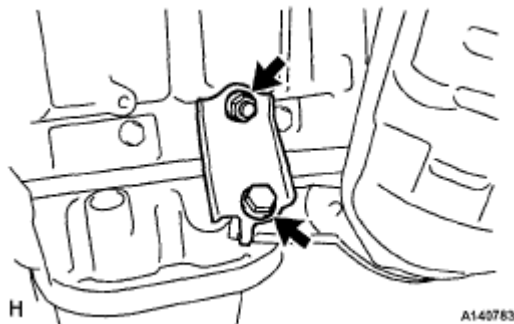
Identifying No. 2 Manifold Stay Bolt & Nut
